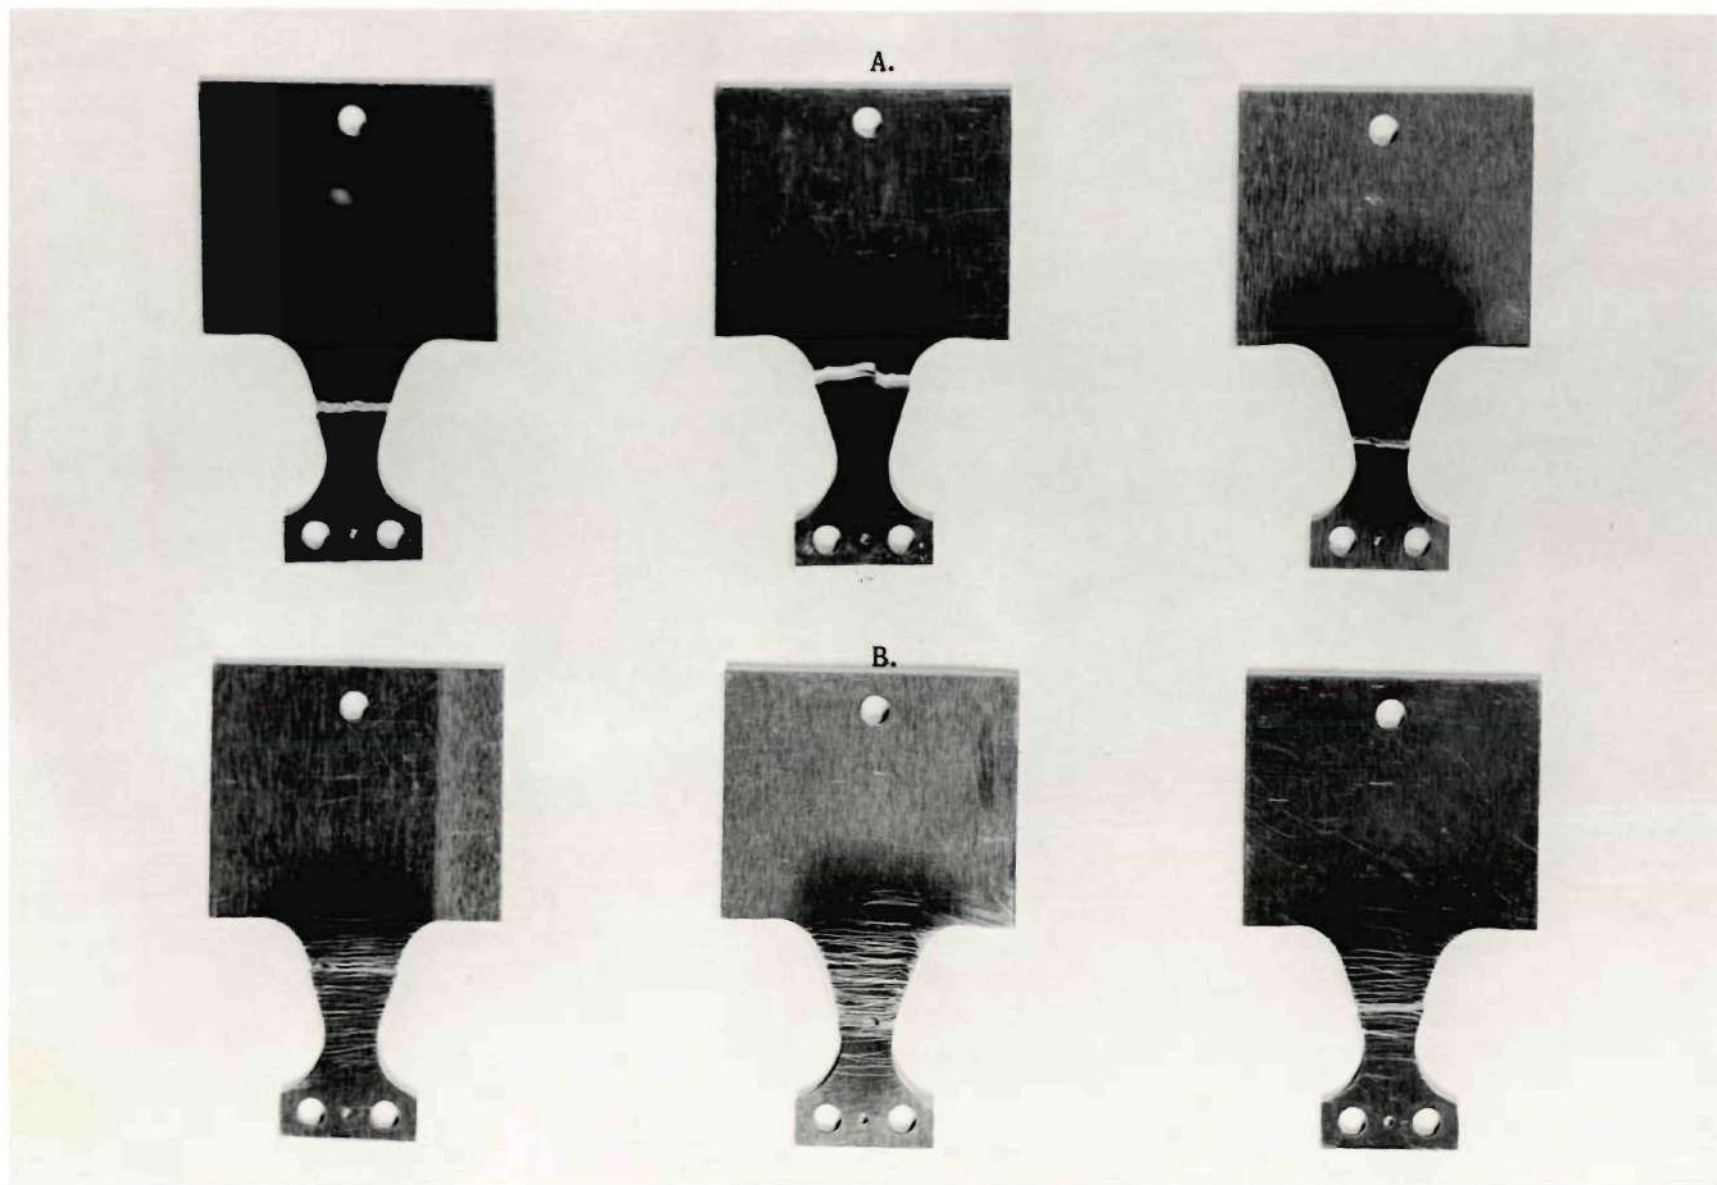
FRACTURED 24S-T3 SPECIMENS. SURFACE FINISH: A. POLISHED, B. GRIT NO. 60
